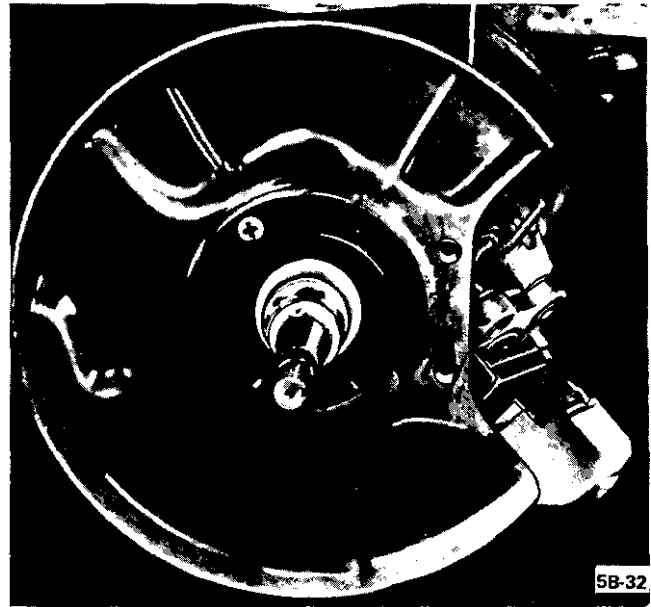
B-32 Brake Disc Shield Attached to Steering Knuckle
